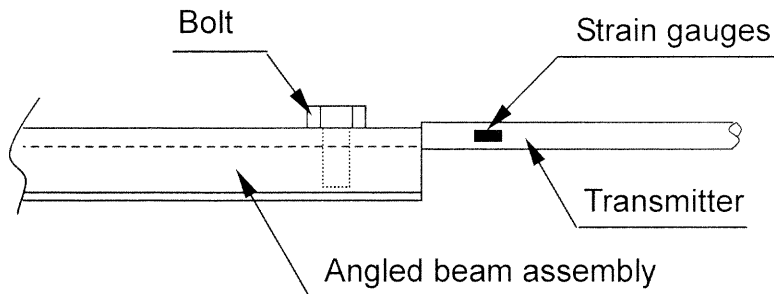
Transmitter is in contact with an edge of the angled beam assembly.
